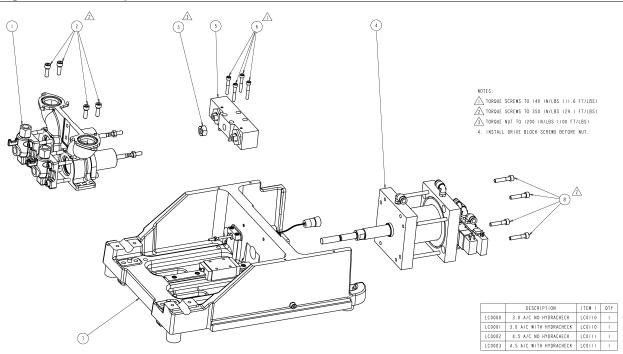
PR70 Base Frame to Air Cylinder, Pump and Drive Block Attachments
